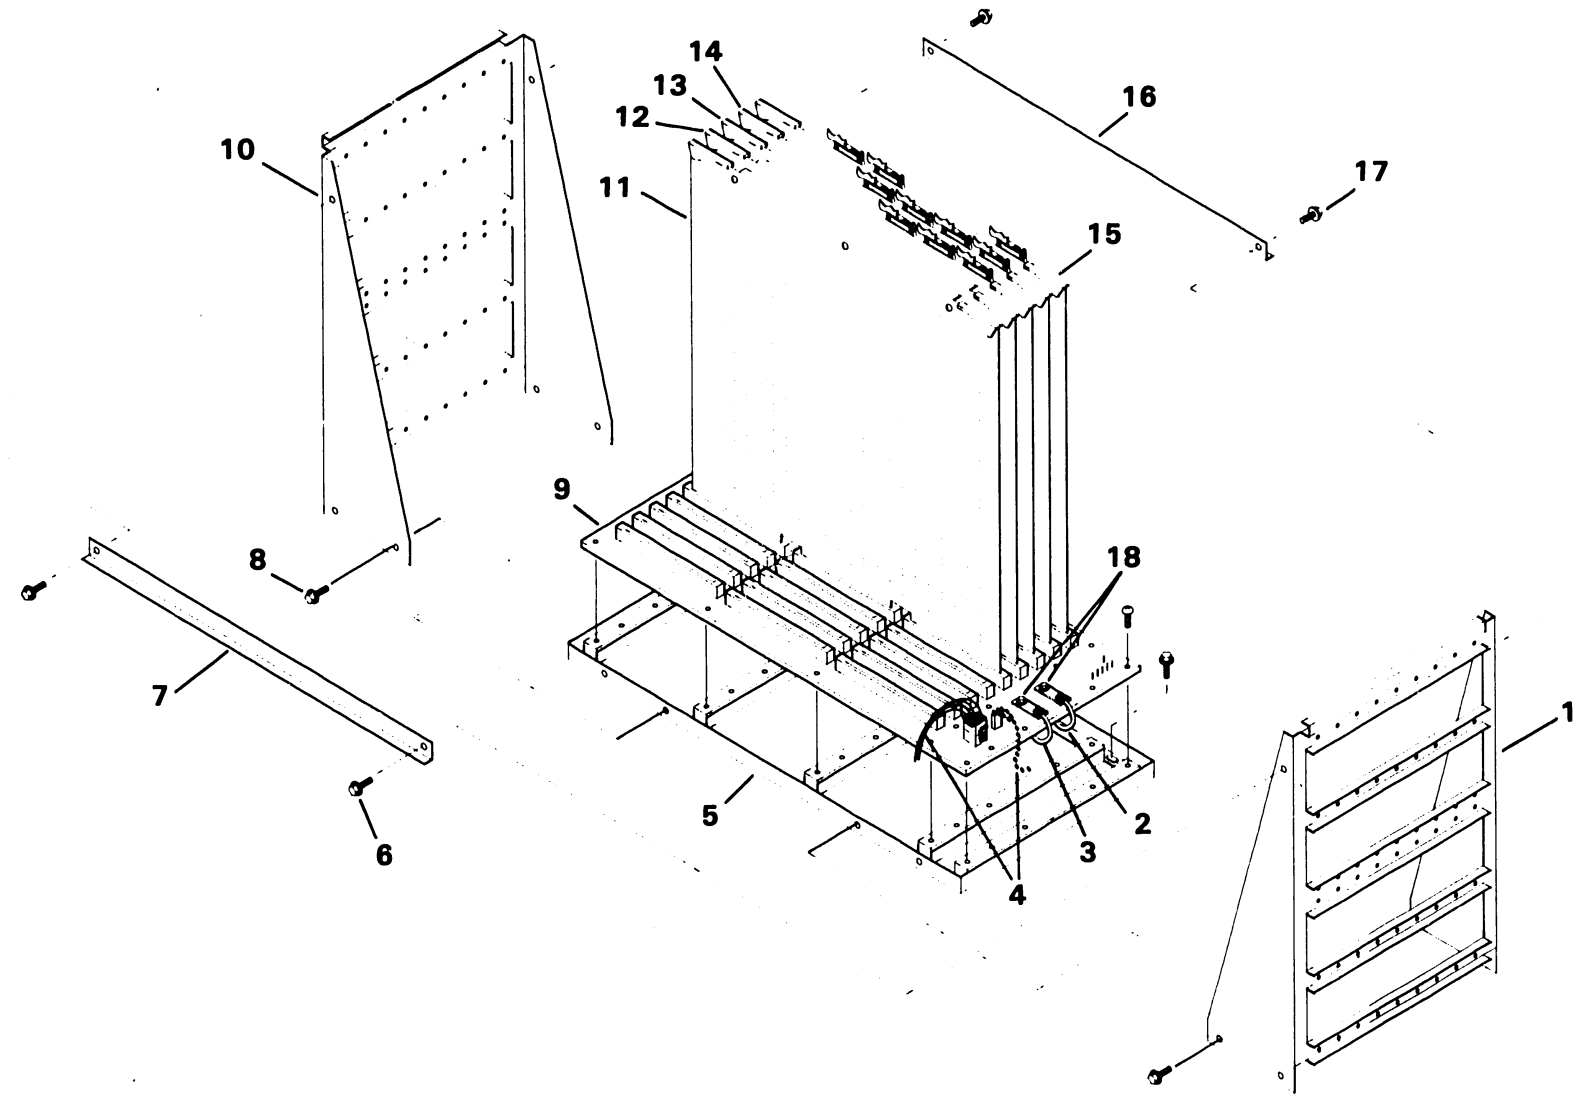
VS25/45 REAR PANEL ASSEMBLY
